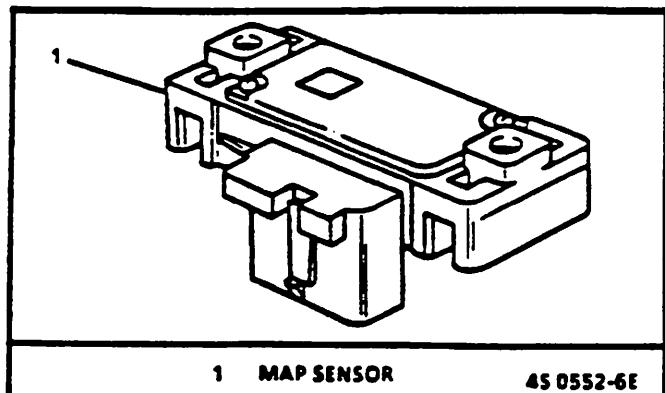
Manifold Absolute Pressure (MAP) Sensor
